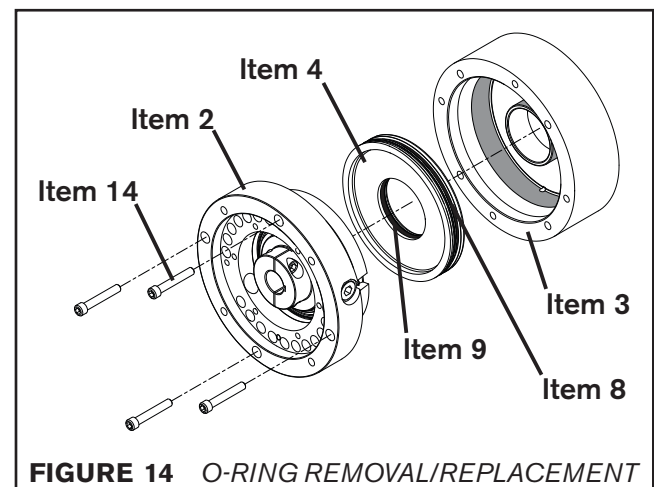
O-RING REMOVAL/REPLACEMENT
